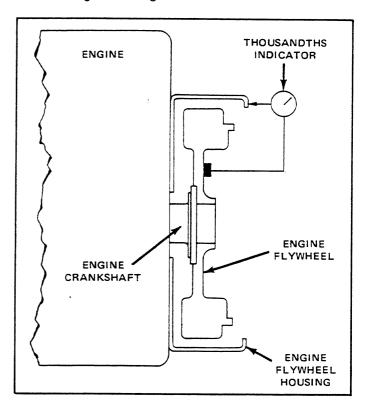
Checking the Race of Engine Flywheel Housing.
